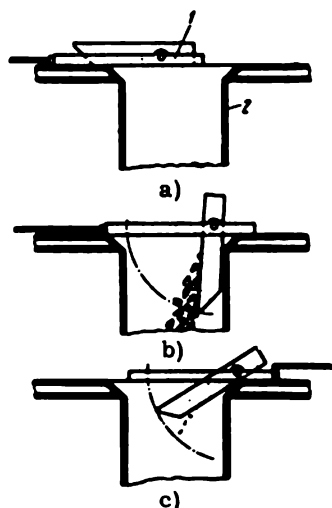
Working diagram of the setup for hardening after soldering in furnaces with a reducing atmosphere:
